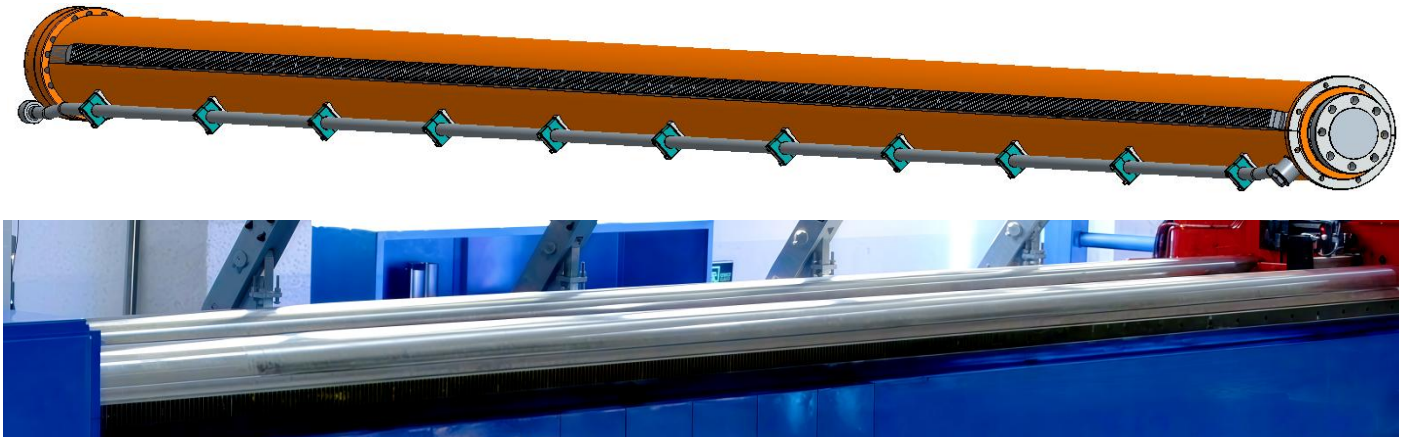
3D Drawing & Physical Photo of Main Thrust Servo Hydraulic Cylinders.
